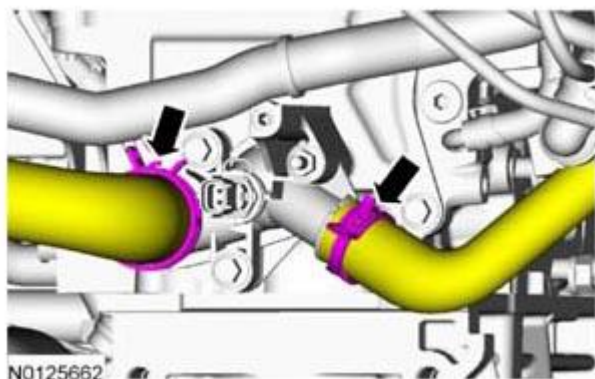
Locating Coolant Hoses From Coolant Outlet
